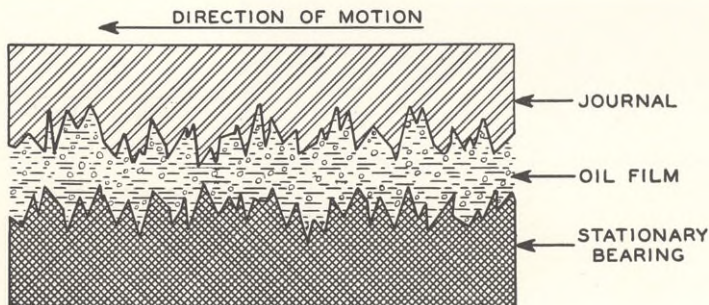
Roughness of the surfaces of a journal and bearing is exaggerated in this illustration. If the oil film becomes thinner, more and more high spots come in contact. Heat thins the film when they rub, and later the bearing fails
